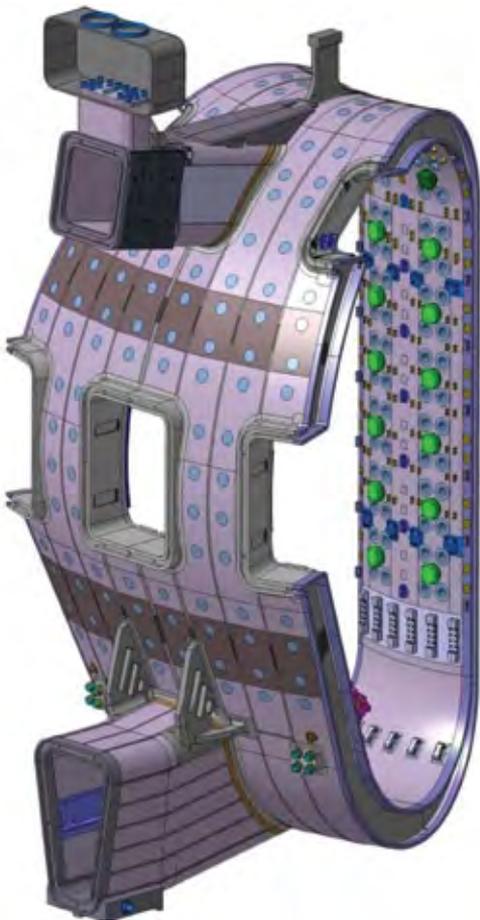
CAD model of sector 5 of the Vacuum Vessel (courtesy of AMW)
